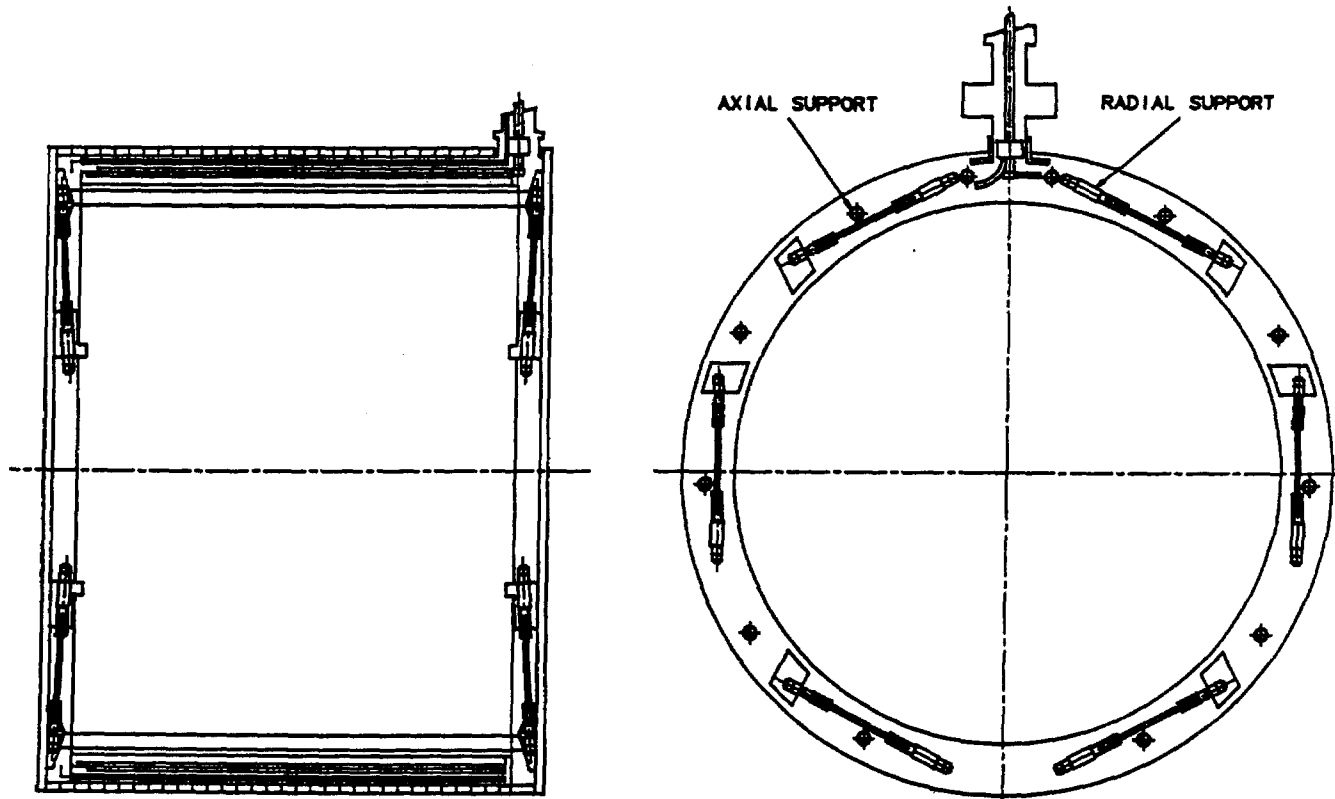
SDC prototype solenoid. Dimensions are given in Table 5-16.
